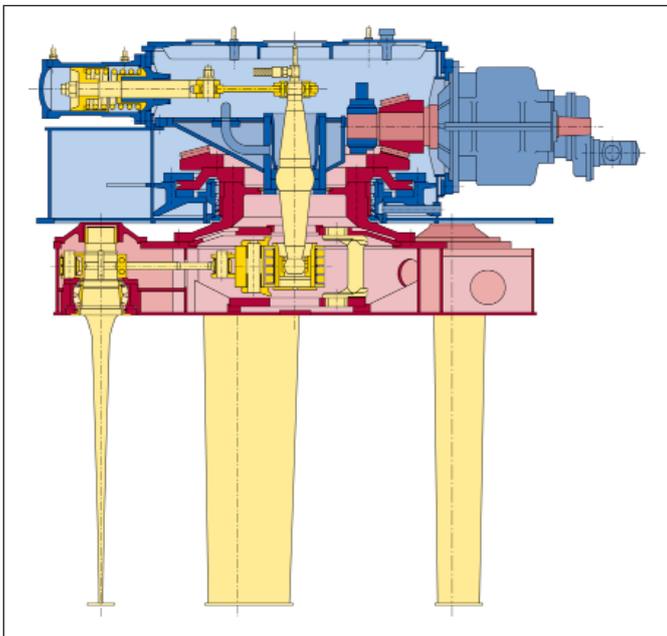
Sectional drawing of a Voith Schneider Propeller.
